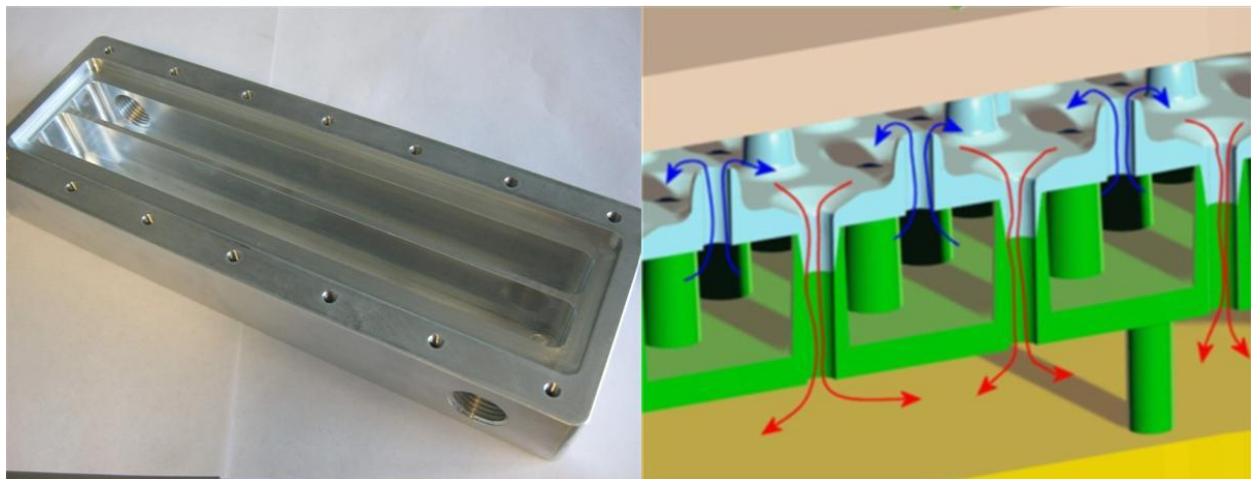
Picture of the aluminum plate on the left and a drawing of the shower power cooling concept patented by Danfoss, on the right [12]
